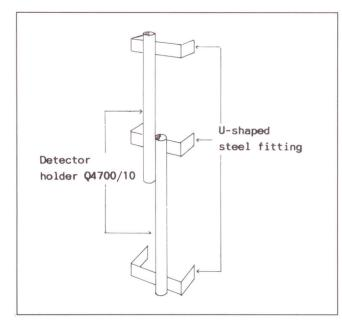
Detector holders mounted with U-shaped steel fittings on the vessel wall.
